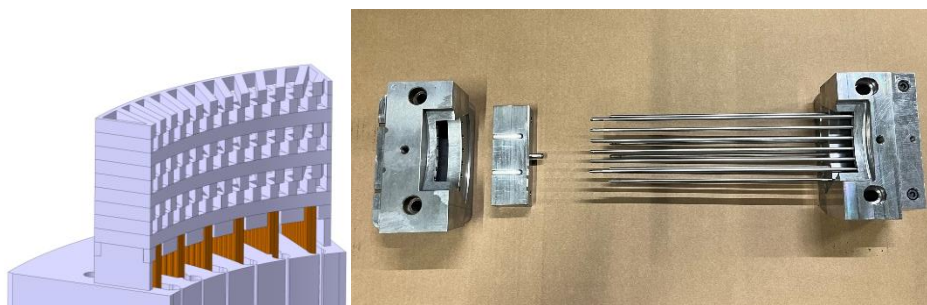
CAD model of a dummy motor segment (left) and mold insert with cooling channel cores (right)
